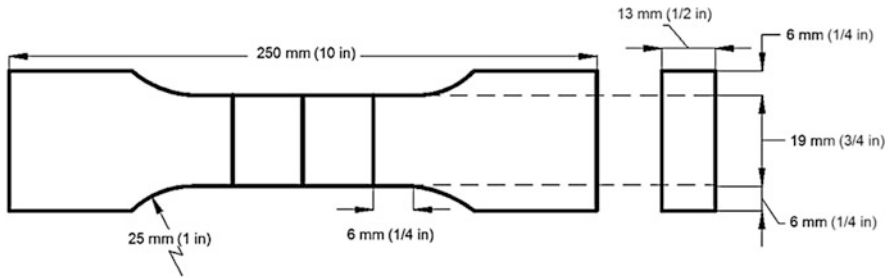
Schematic representation of tensile specimen dimensions [11]
